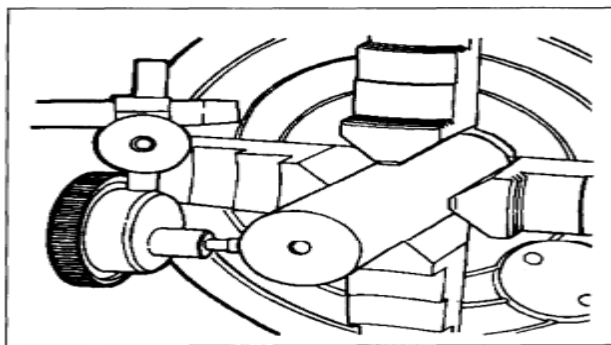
Mounting work in a 4-jaw independent chuck.
